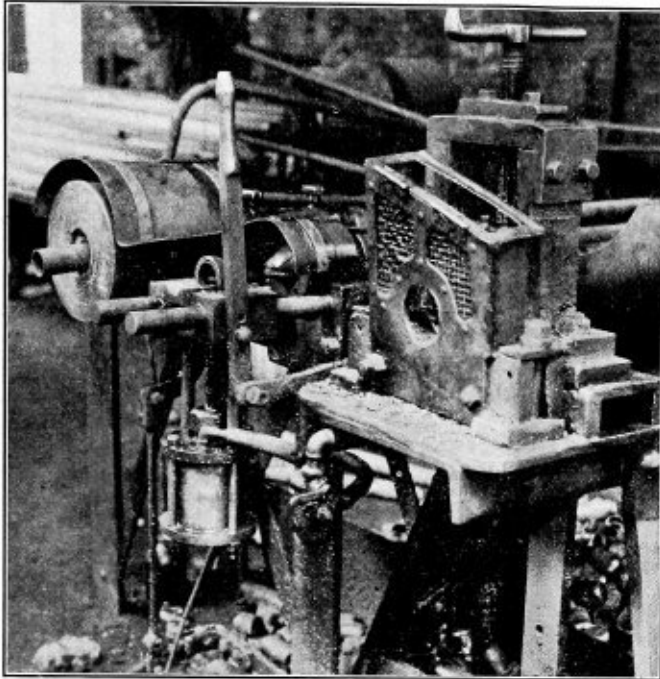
Pipe Cutter, Reamer and Grinder Used to Prepare Boiler Tubes for Welding On Safe-Ends
